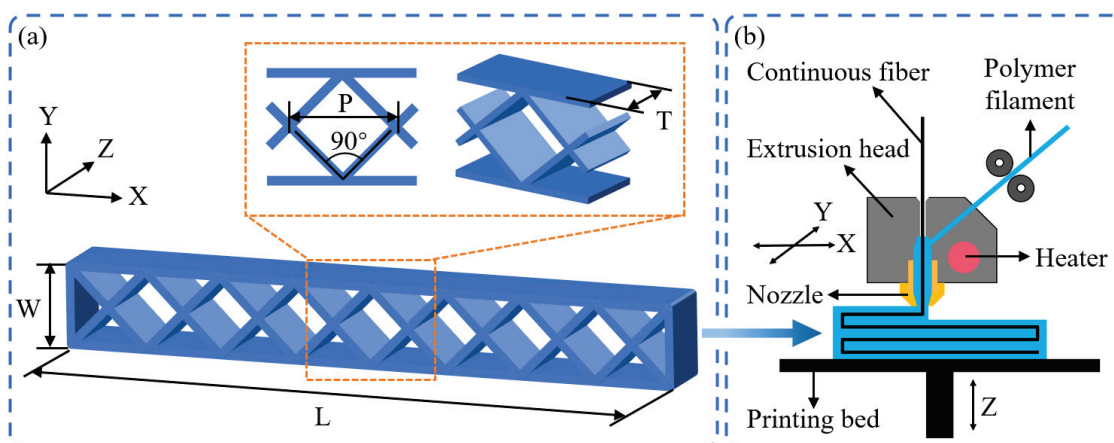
Schematic presentations of (a) the diamond-filled CFRPHSs with geometrical dimensions and (b) 3D printer using the in situ impregnation FDM technique.
